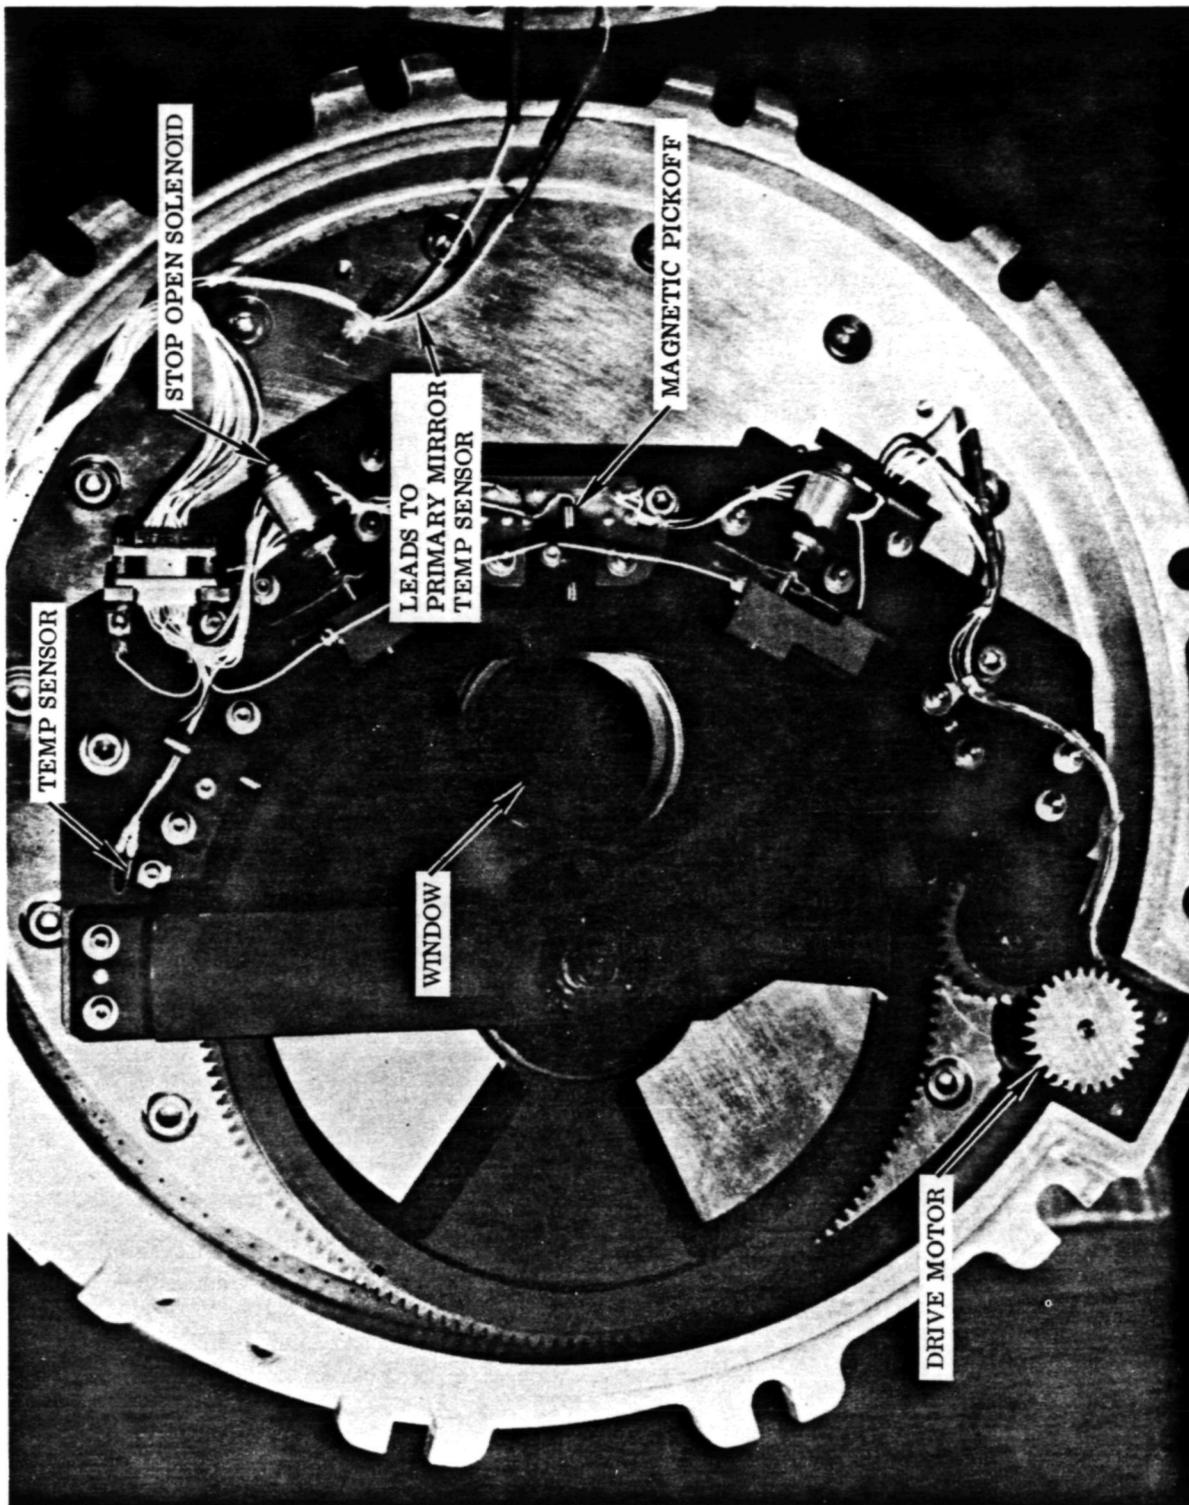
CHOPPER WHEEL ASSEMBLY
